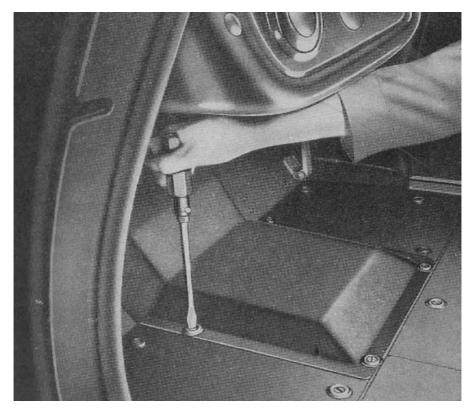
Removing Fluid Flywheel and Gearbox Cover
